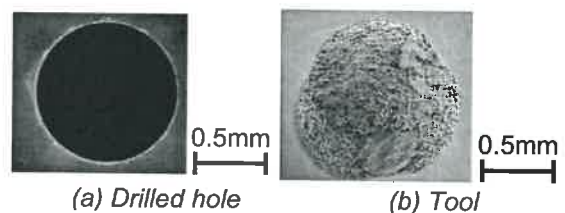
Appearance of crack at the exit hole and tool failure after drilling of 100th
